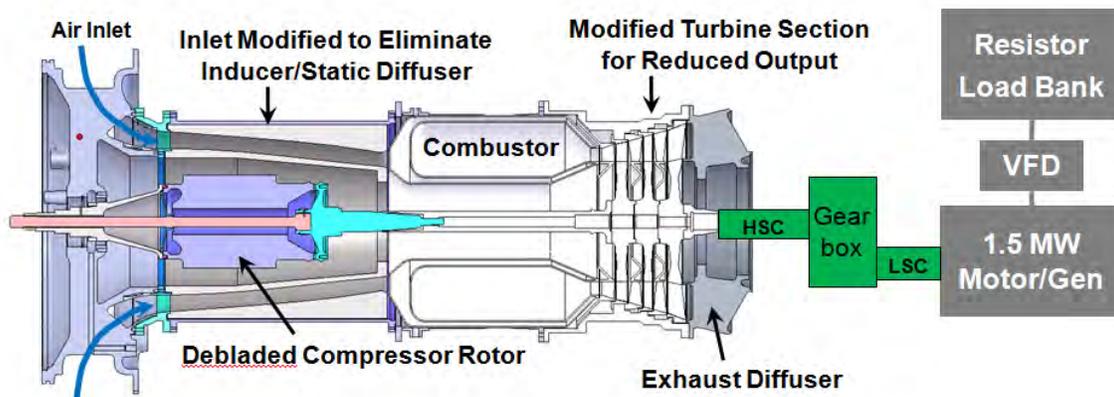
ISCE B1 Engine Schematic, Modified for Turboexpander Module Checkout Testing
